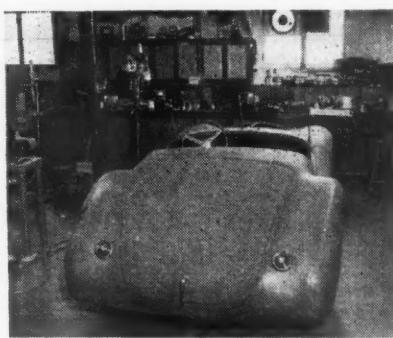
The body is welded into a single piece and welded to the frame, which is bolted to the chassis.
